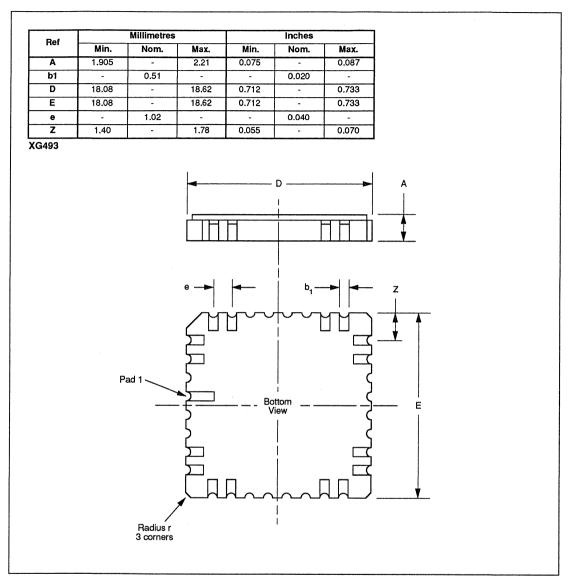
64-Lead Leadless Chip Carrier - Package Style L
